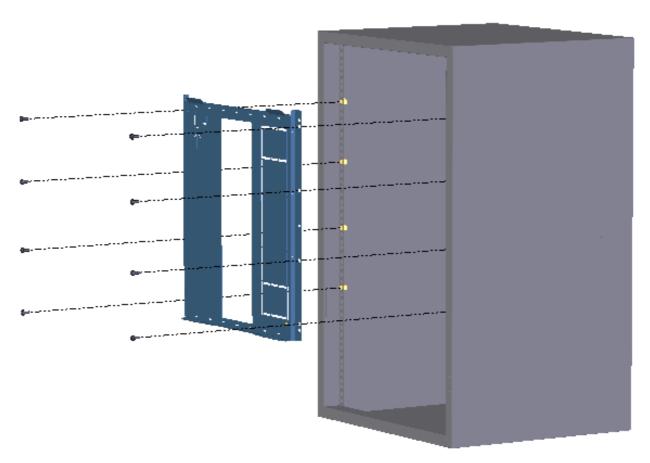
Rack Mounting A Wall Mount Dimmer
